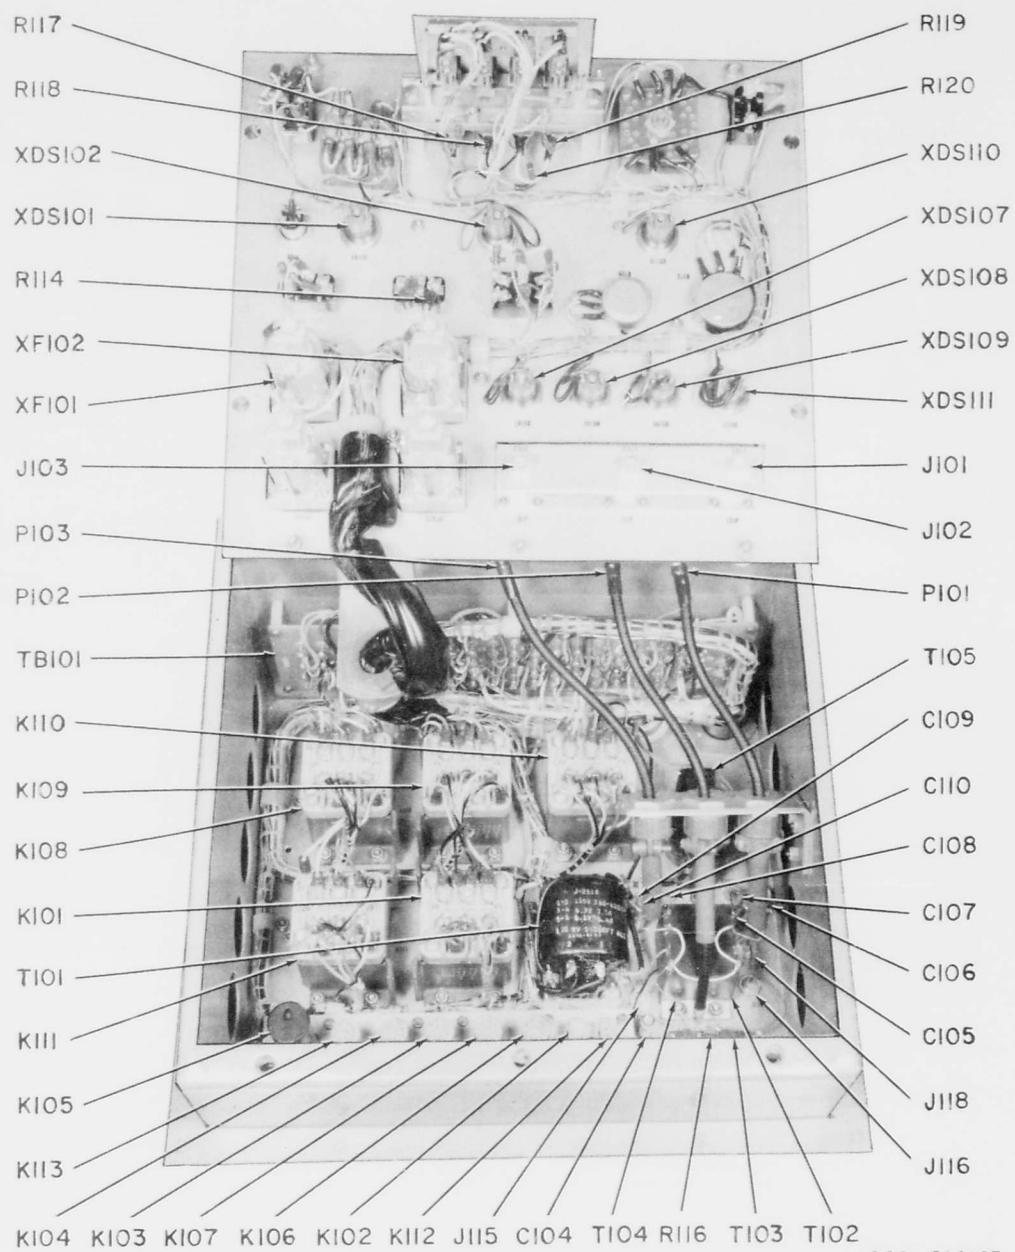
Oil-Filled Test Chamber, Plug-in Unit Test Set.
